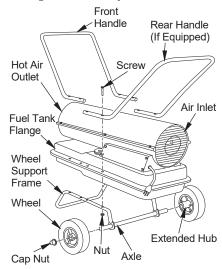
Wheel and Handle Assembly, 115/165 Models Only
